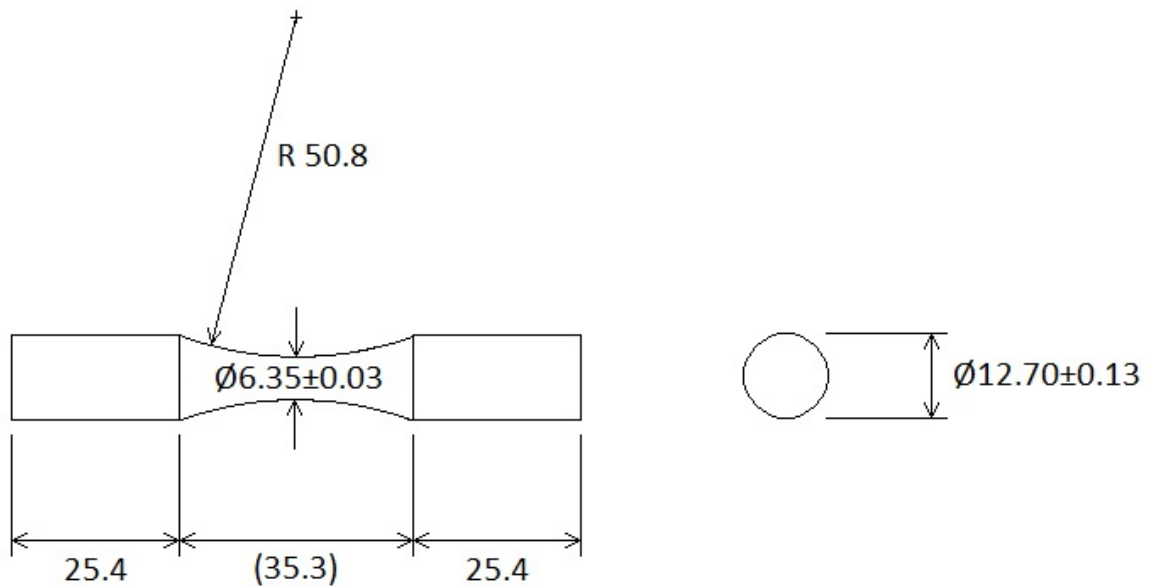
Fatigue test specimen with machined surface. All dimensions in mm.
